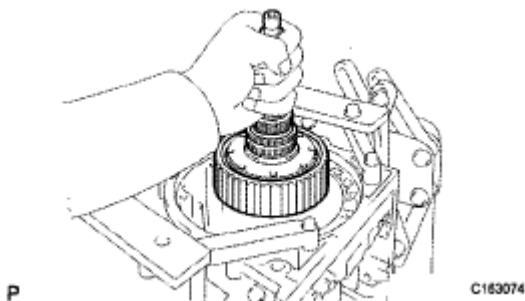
Installing Intermediate Shaft With Rear Planetary Ring Gear Flange
